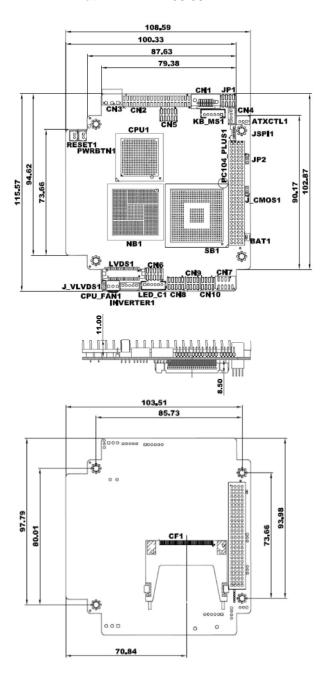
PM-945GSE-N270 Dimensions (mm)
